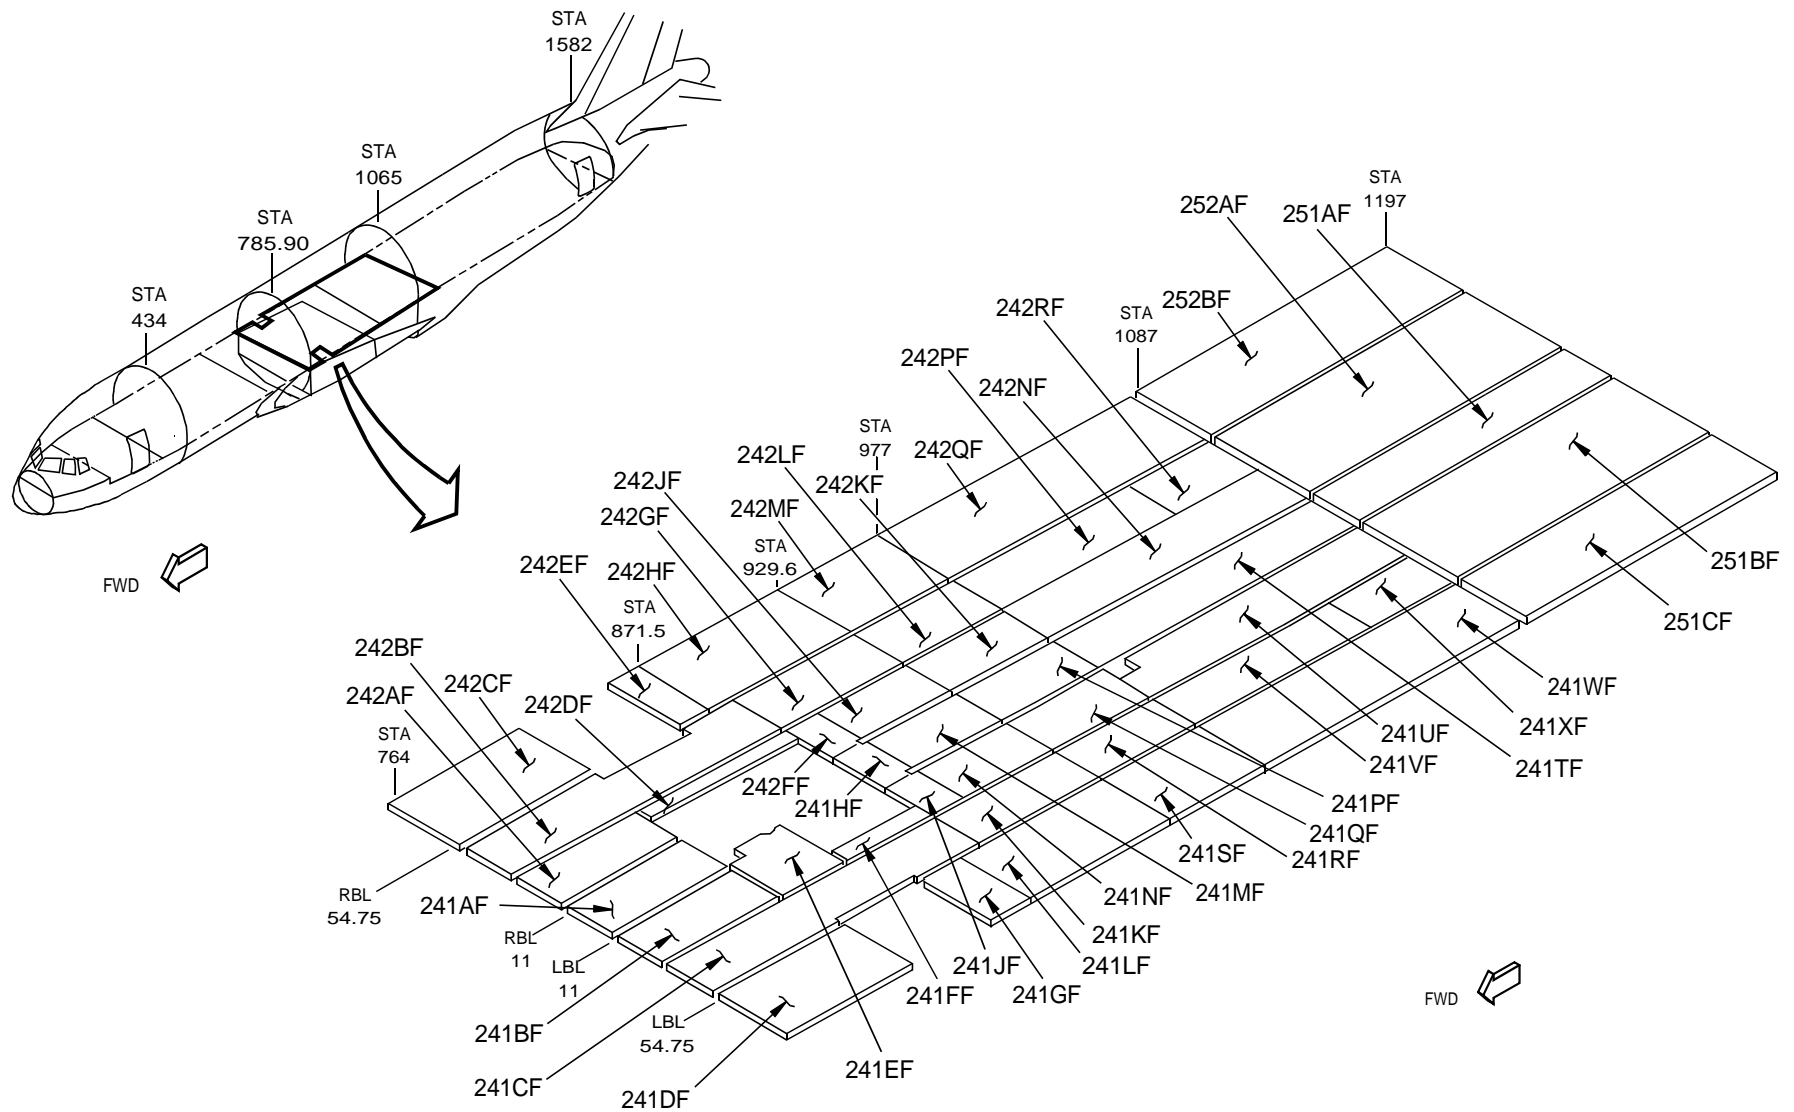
SUB-MAJOR ZONE 241/242/251/252 PASSENGER CABIN FLOOR PANELS BS 764 TO BS 1197
